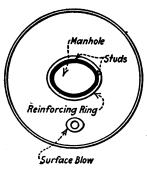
Drum Head Showing Manhole Opening — Inside View of Drum Head
